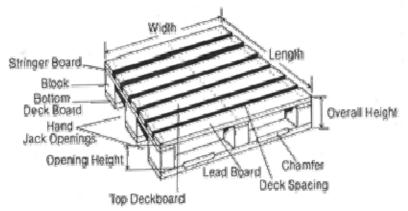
Block Pallet Construction (Larson Pallet & Crating, 2006)
